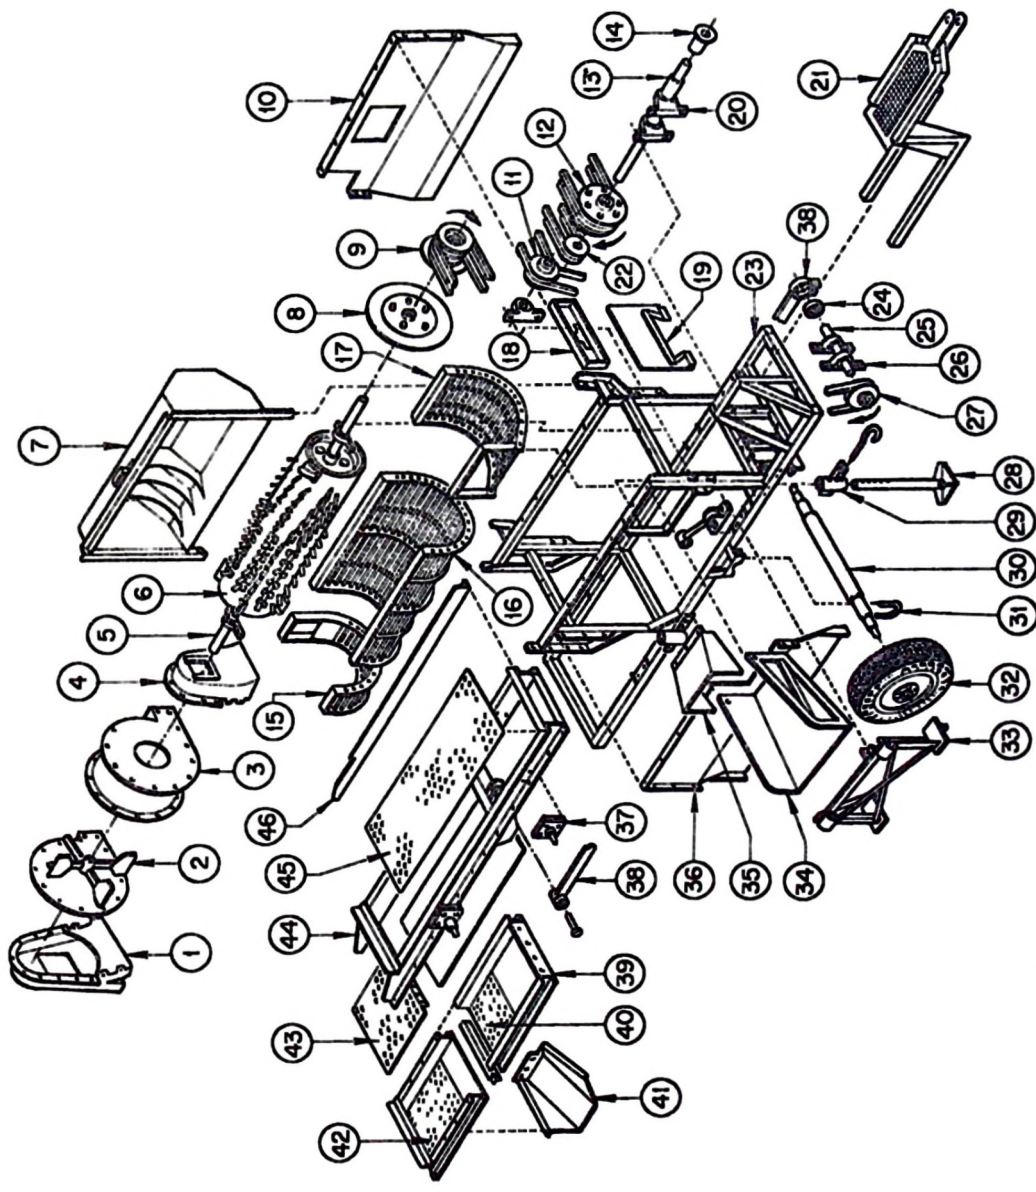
Exploded view of the modified IRRI-PAK multicrop thresher.
